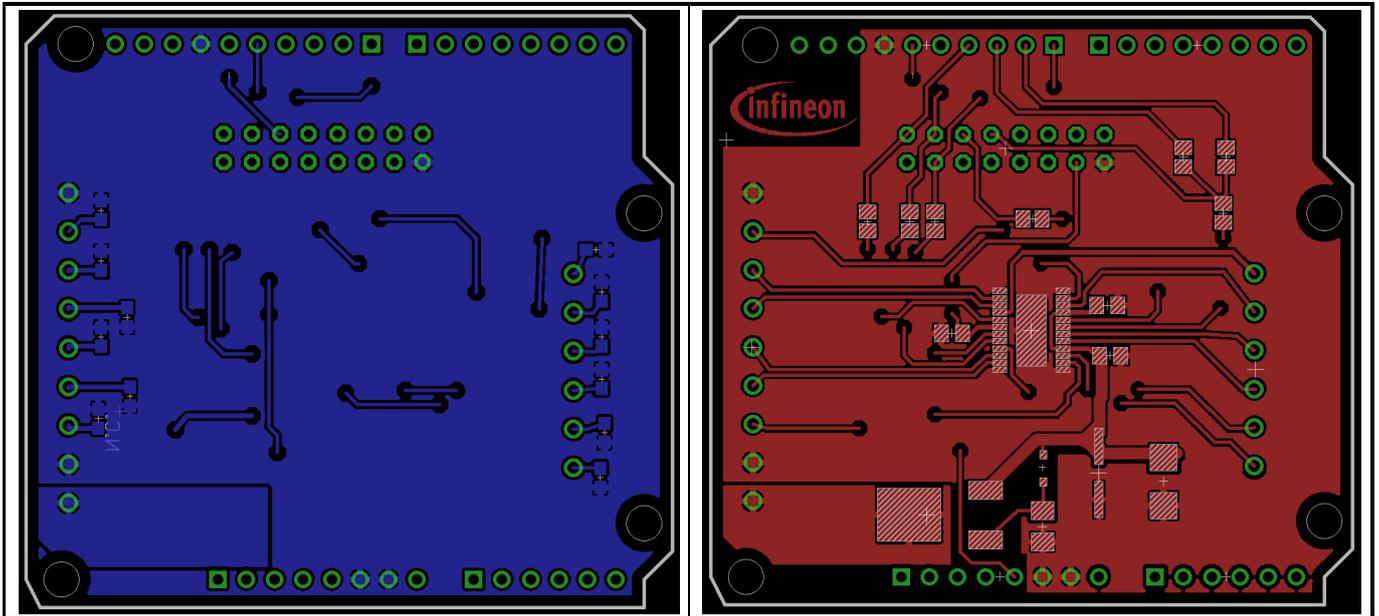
Figure 5 DC Motor Control Shield – Bottom and top layers
